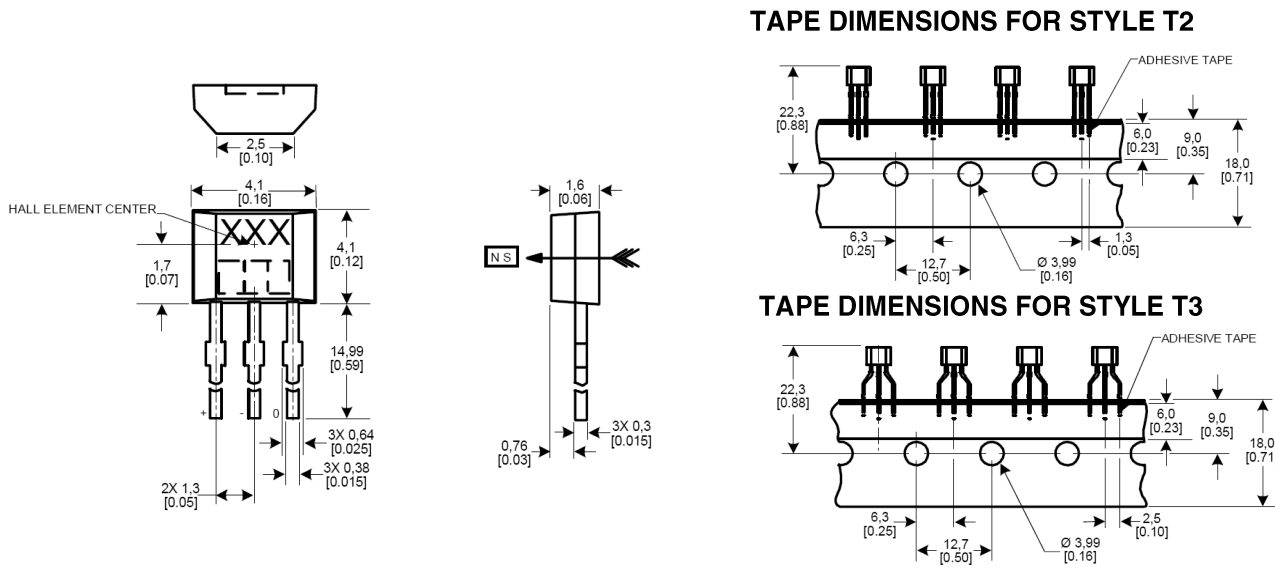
SS30AT SERIES MOUNTING DIMENSIONS (for reference only) mm/[in]
